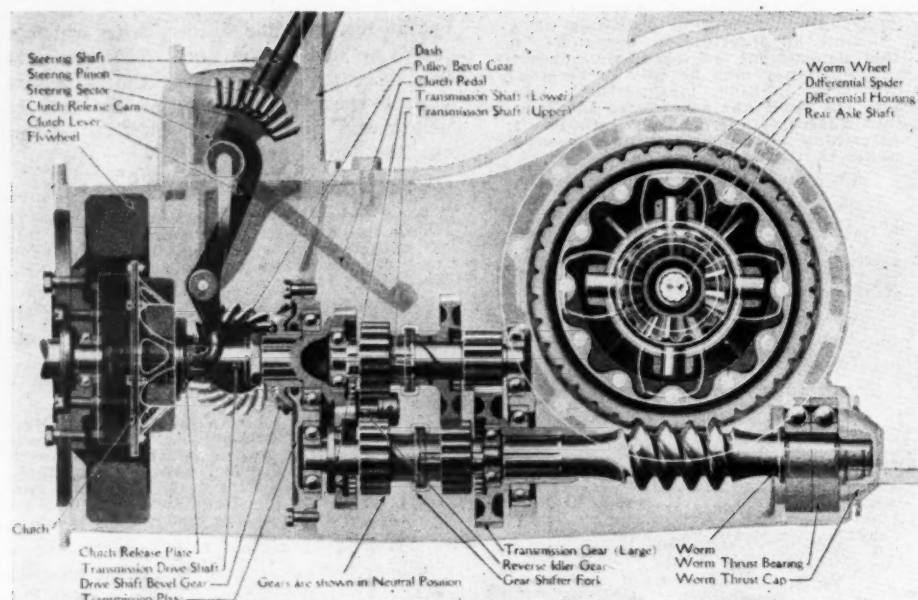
Fordson tractor transmission and clutch assembly, showing the worm and wheel that drives the rear axle
